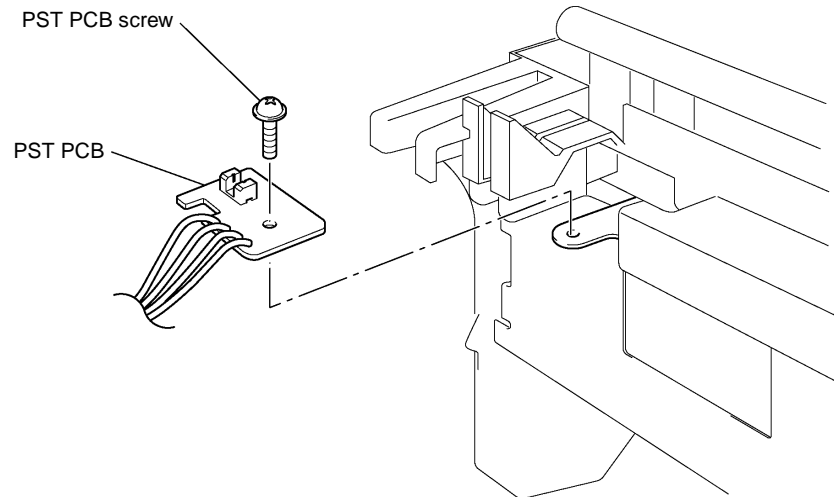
Removing the PST PCB (Paper Sensor PCB)
